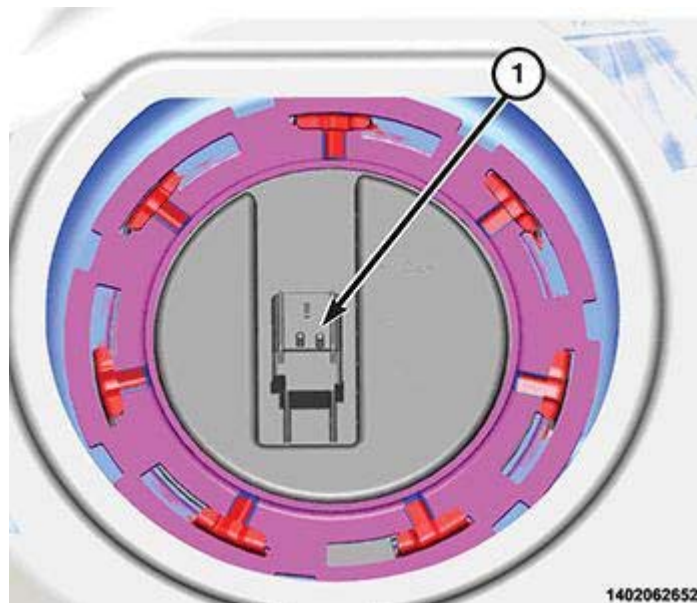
Main Fuel Pump Module Wire Harness Connector
